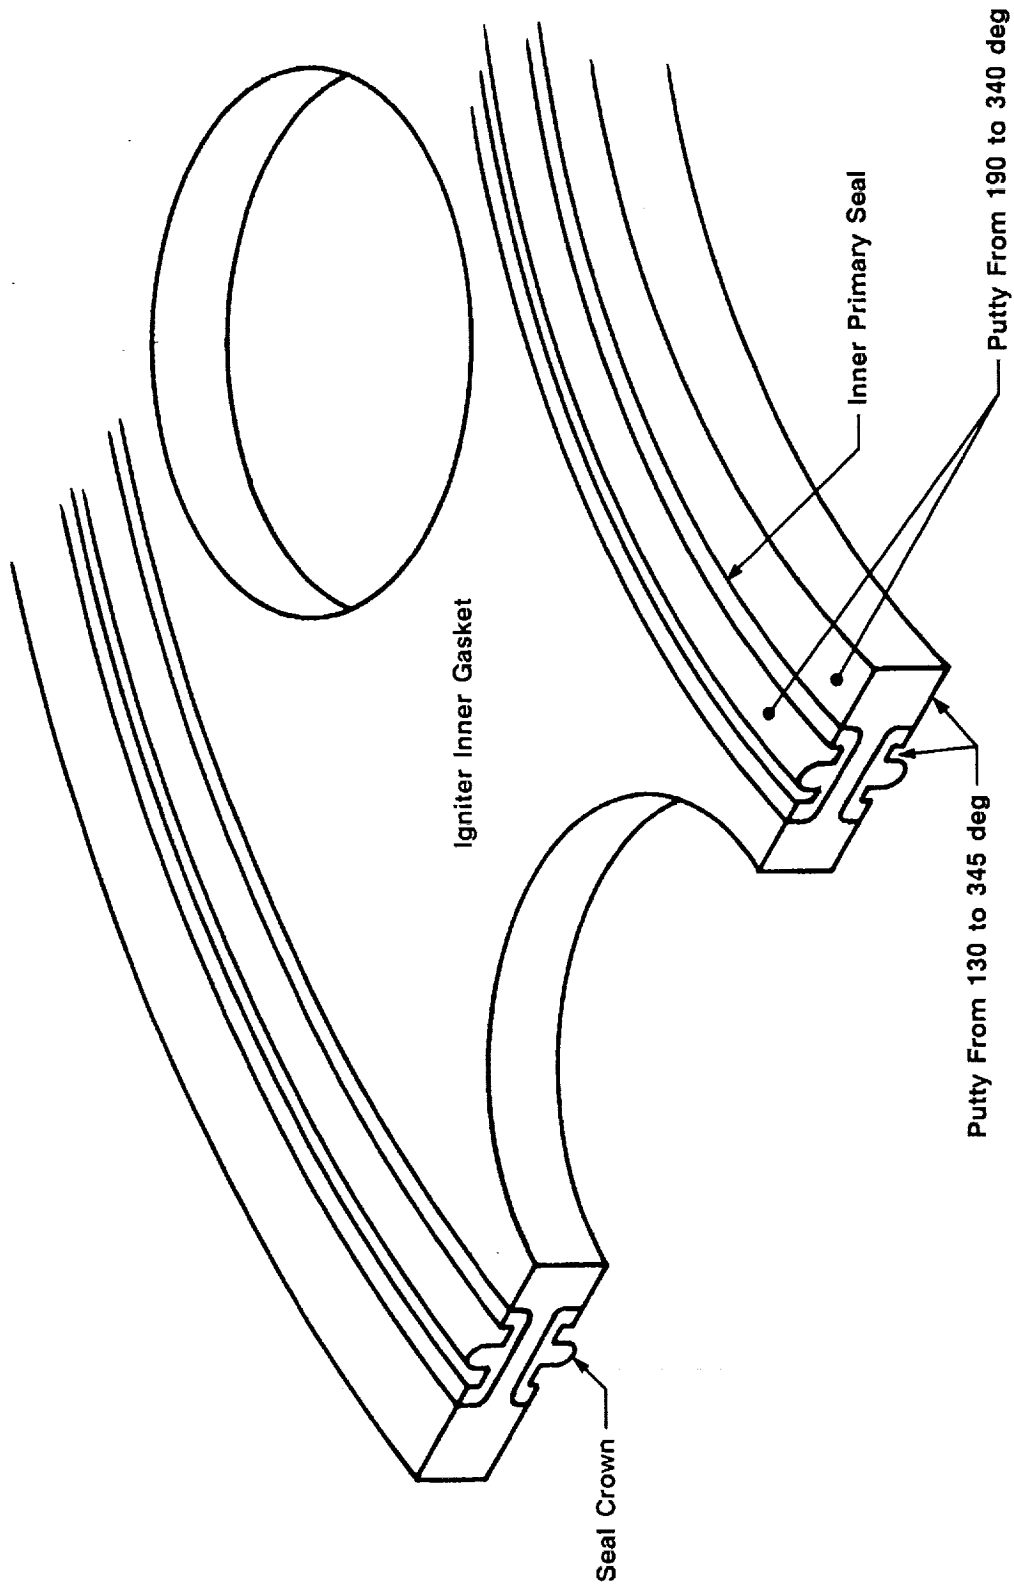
Location of Putty on TEM-5 Igniter Inner Joint Gasket
